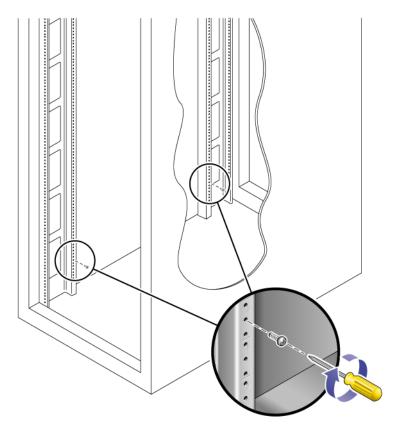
Inserting Rail Mounting Screws in Middle Holes of the Upper Mounting Unit of the Mounting Slot
